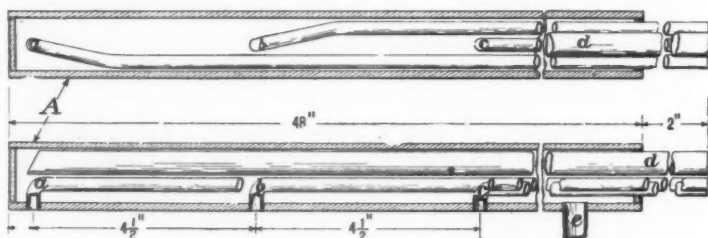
SECTION OF GAS-SAMPLING TUBE.
